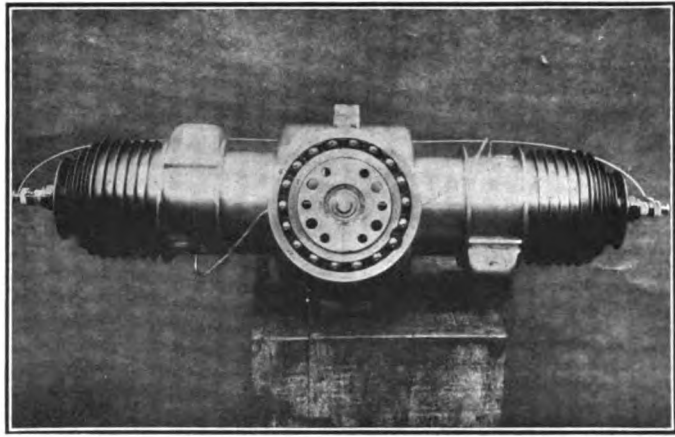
View of the motor with the magneto removed showing the ball-bearing crankshaft and simplicity in designing
